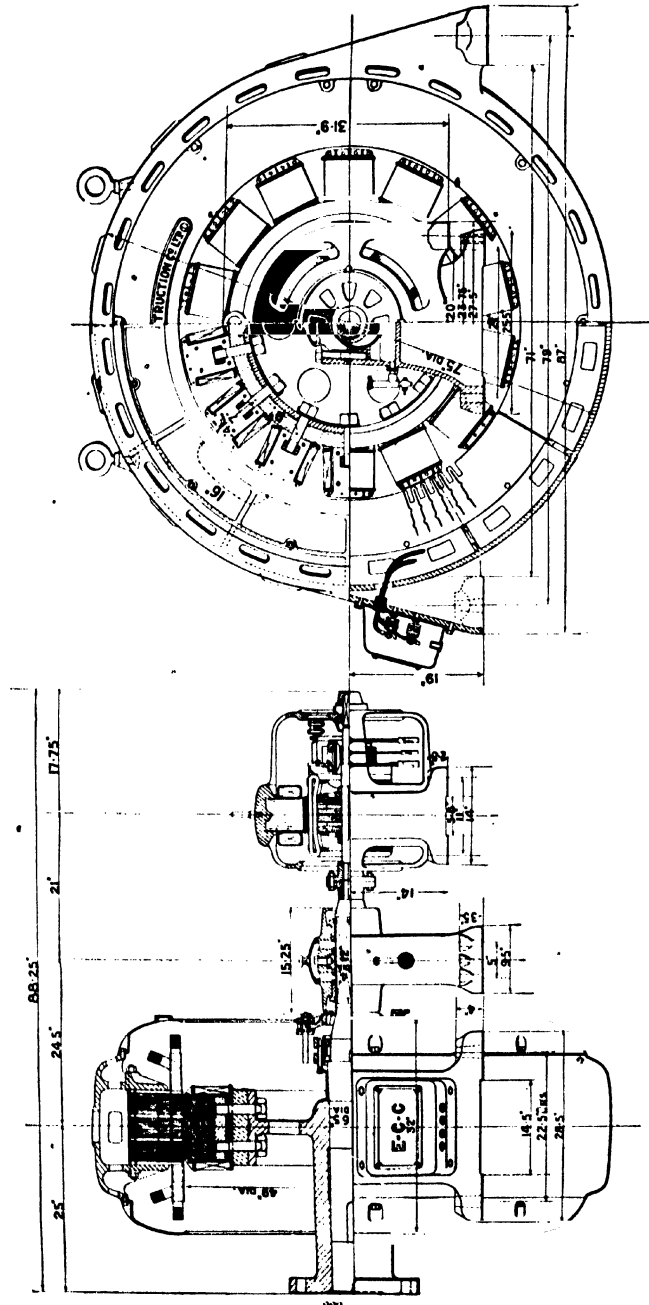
Sectional Arrangement E.C.C. Alternator
